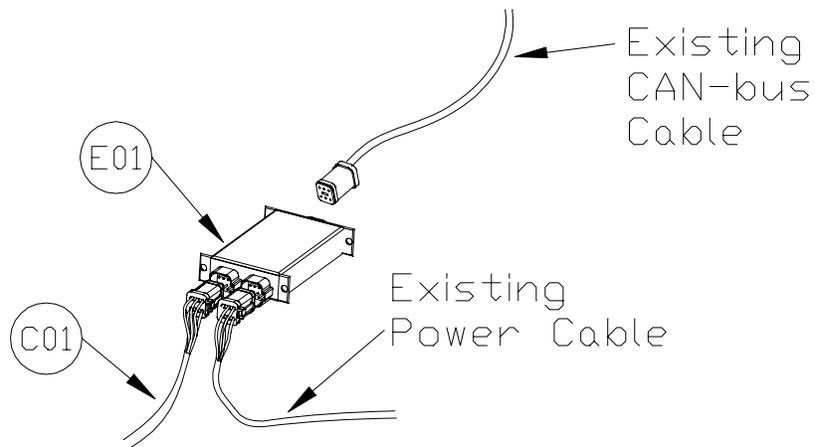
Roll Sensor Mounting (Viewed from the rear of sprayer)
